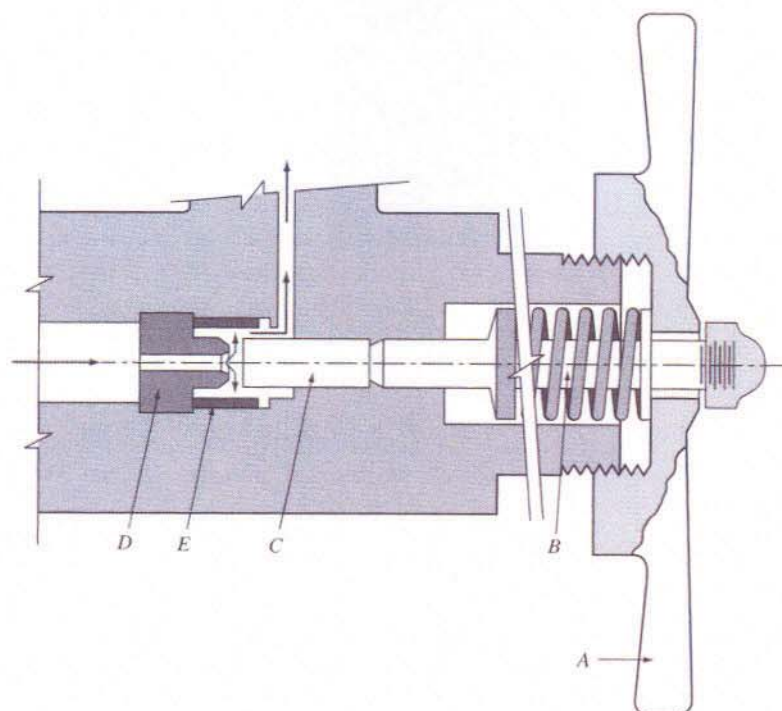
Details of a high pressure (Manton-Gaulin) homogenizer valve: A, handwheel for adjusting pressure; B, spring-driven valve rod; C, valve (see Figure 3.6); D valve seat (also see Fig. 3.6); and E, impact ring of hard material. The ring E is sometimes eroded by the impact of cells and debris, which can be abrasive. (Schematic based on a design by Manton-Gaulin APV.)
